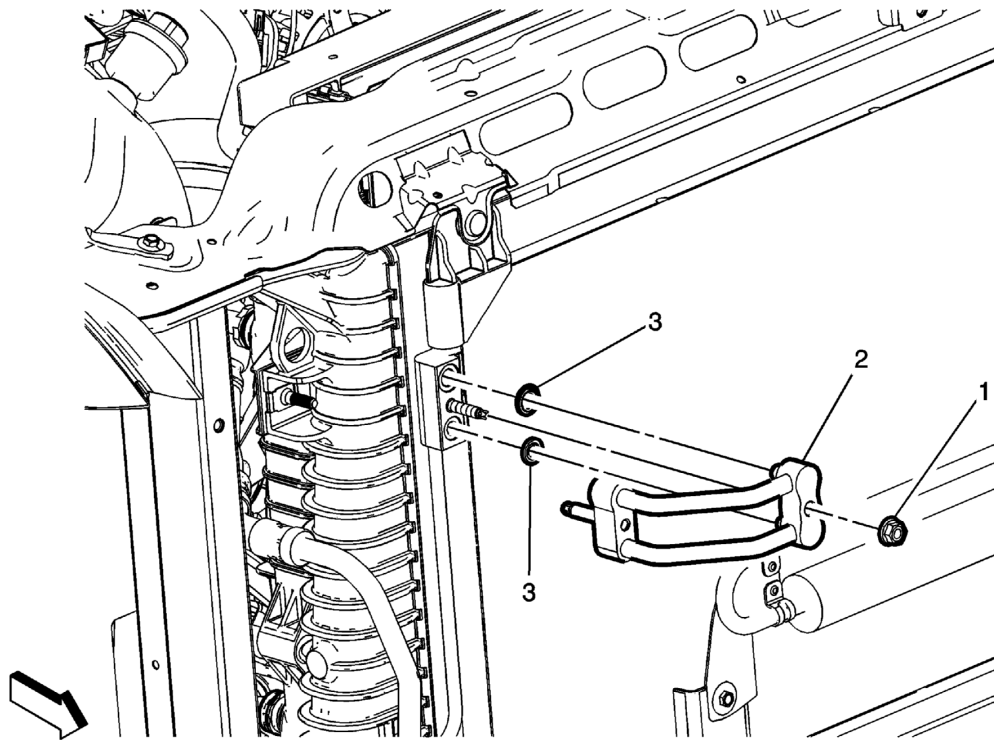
Air Conditioning Evaporative Connector Hose/Tube and Compressor and Condenser Hose
